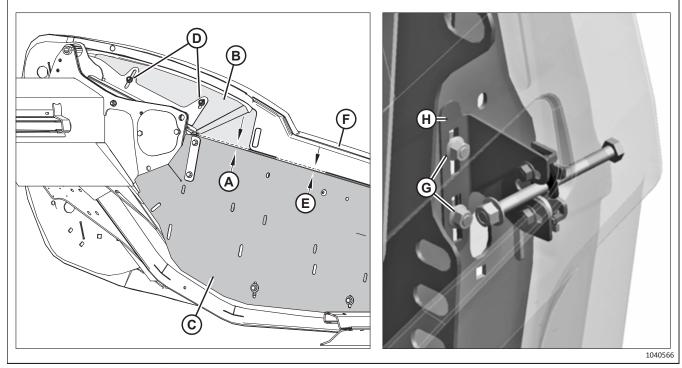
Clearance Specification between Neck Shield and End Panel
